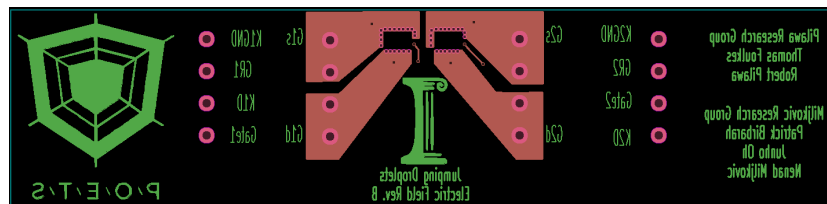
PCB artwork for drill locations and for the back copper, back mask, and back silk layers of revision B.
